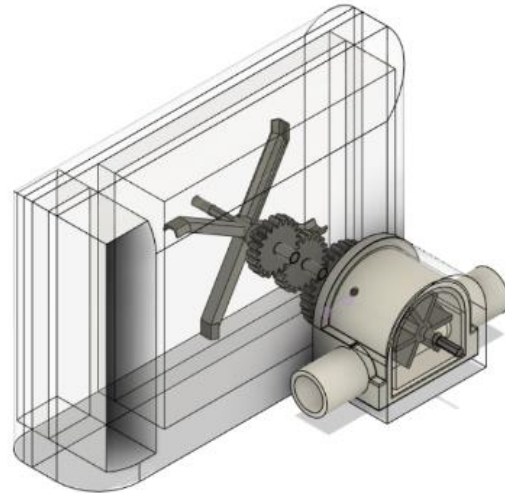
CAD Assembly of Gamified Incentive Spirometer
